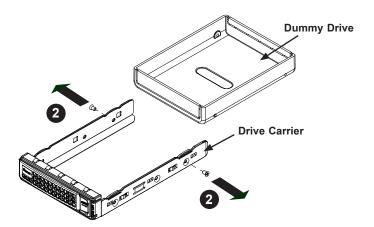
Removing a Dummy Drive from the Drive Carrier
